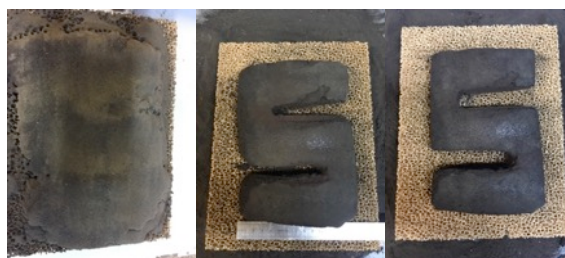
Solar 3D printed S-shape piece at the end of sintering process (left), after removing the loose powder (middle) and after sand polishing (right). Credit: RegoLight consortium
